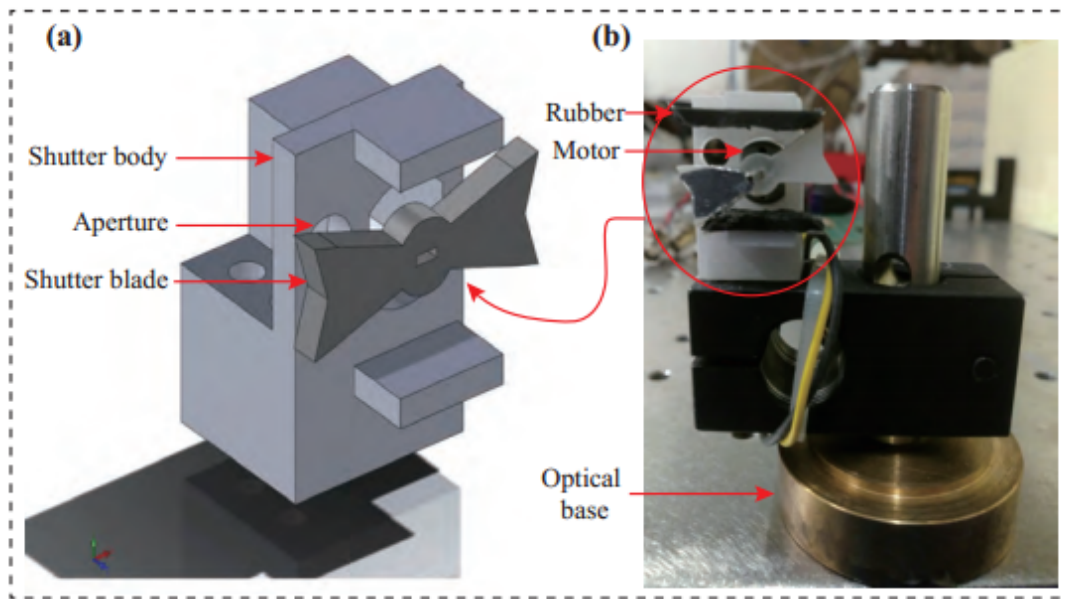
Optical shutter schematic. (a) Solidworks design of the shutter body and the blade; (b) assembled shutter glued on a baseplate with a pillar. The blade can be rotated by a DC motor and will be stopped by the two rubbers, the motor is controlled by a TTL signal, which can apply a sequence to turn on and off the aperture.
